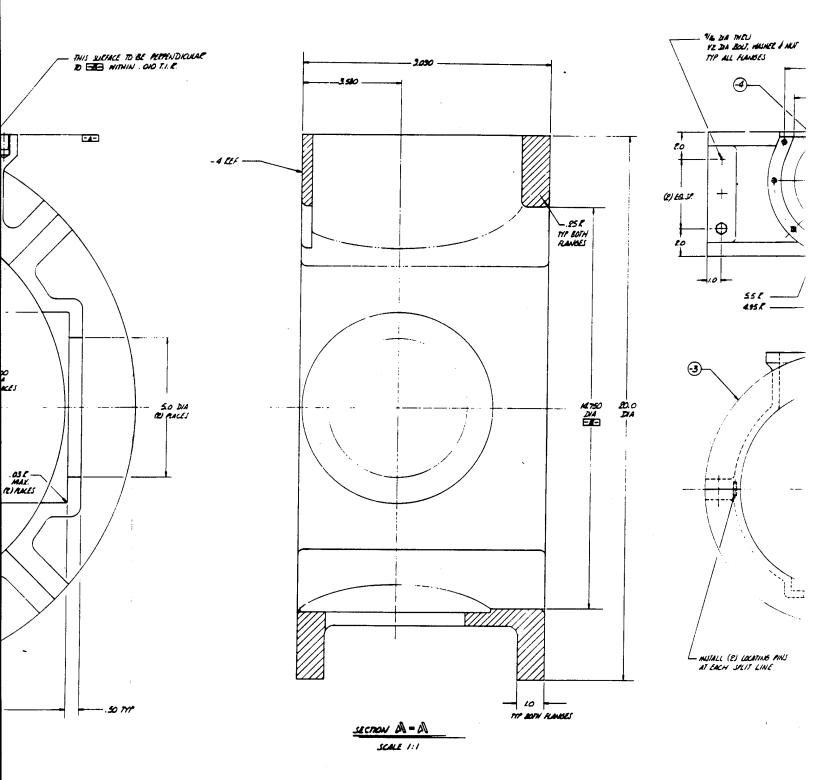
Shell Mold Assembly - Helicopter Transmission Housing (WRD Drawing No. 4695).
